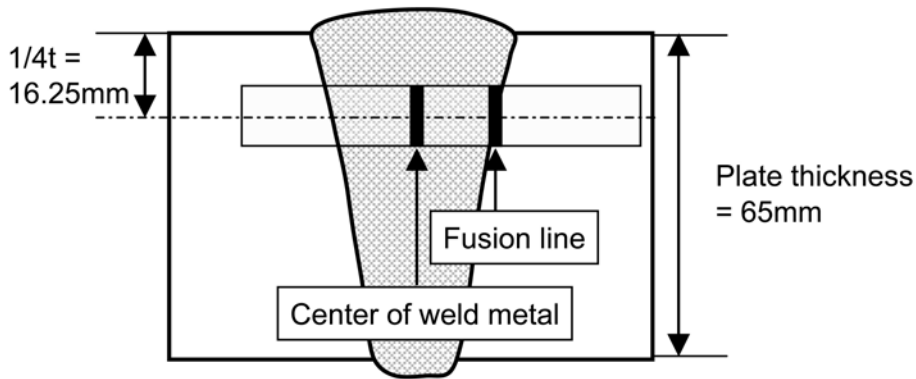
Notch location of Charpy impact test of EGW welded joints.
